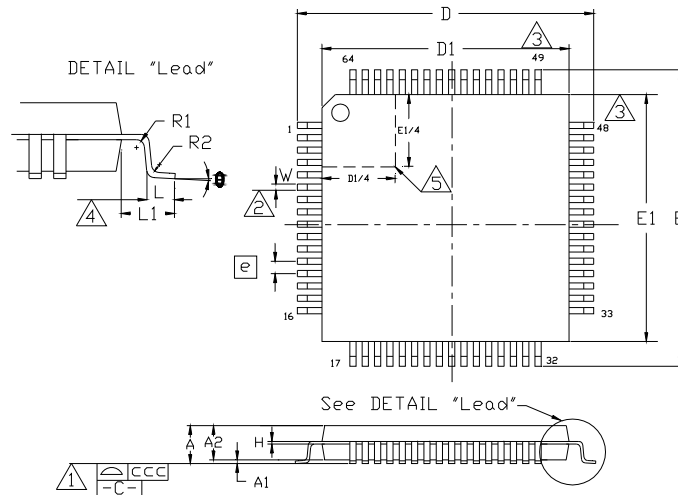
64 Pin TQFP Package Outline, 10X10X1.4 Body, 12x12 mm Footprint
